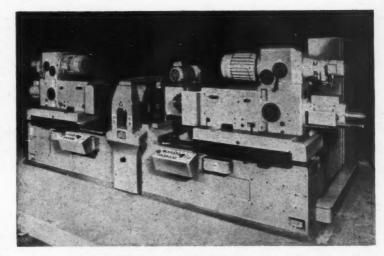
Standard fine-boring heads, with equipment which includes radially-fed facing slides operated by hydraulic cylinders, are incorporated in this 3-way machine for operations on gearbox castings
